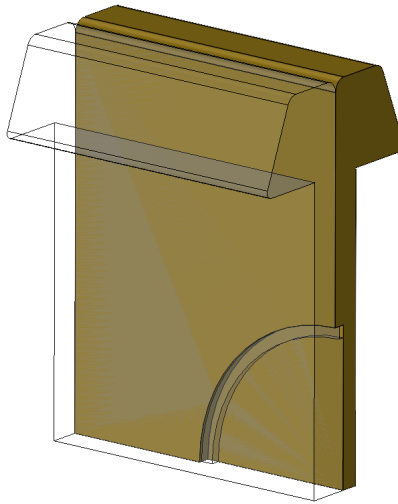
Geometry of the modified rope grips-like fixture adapter.
